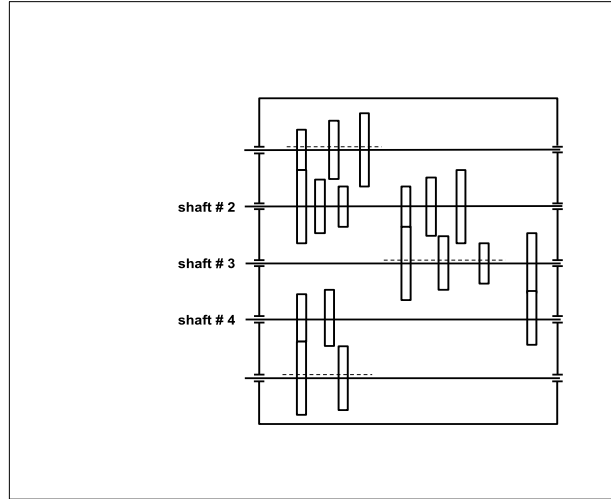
18-speed Gearbox layout. Gears in shafts 1, 3 and 5 can be translated to mesh with corresponding gears in shafts 2, 4 and 6 respectively. With three different possible meshing of gears between shafts 1-2, 2-3 and two in shafts 2-4, 18 different output speeds are possible.
